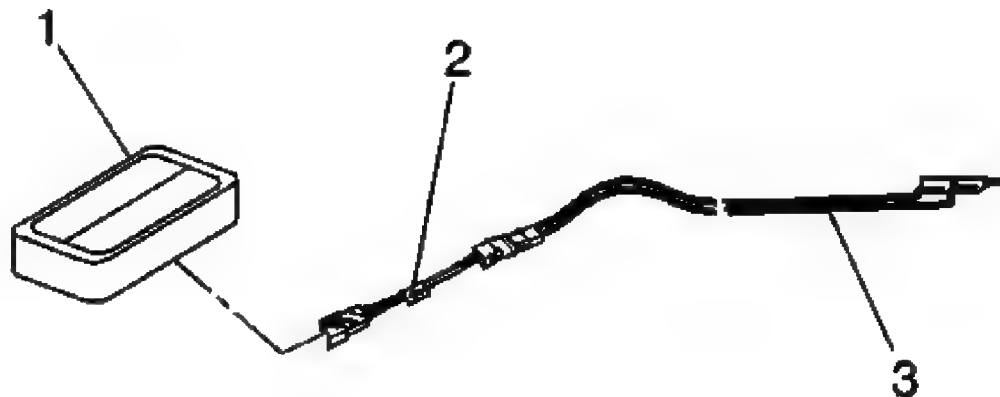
Inflator Module & SIR Deployment Harness Adapter
